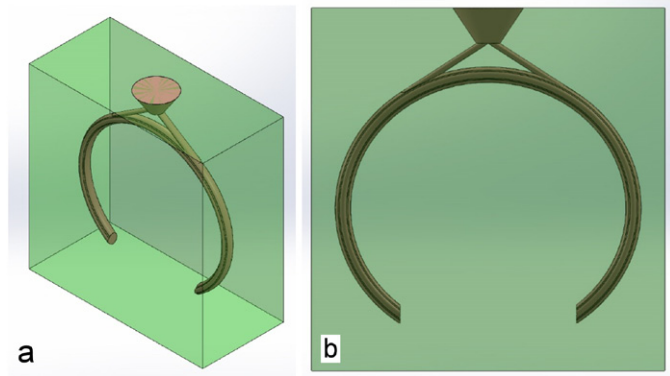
Isometric view of the developed mould and casting technology in isometric view (a) and front view (b)
